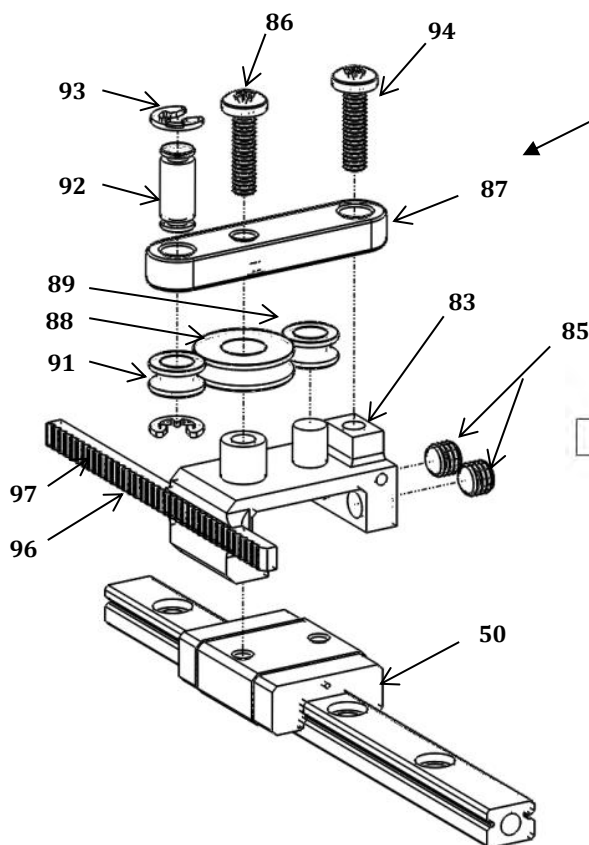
Exploded perspective view of the assembled differential pulley and ratchet slider
